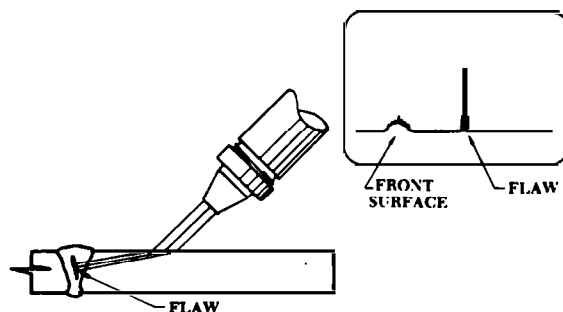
Angle Beam Penetrating a Flat Plate
